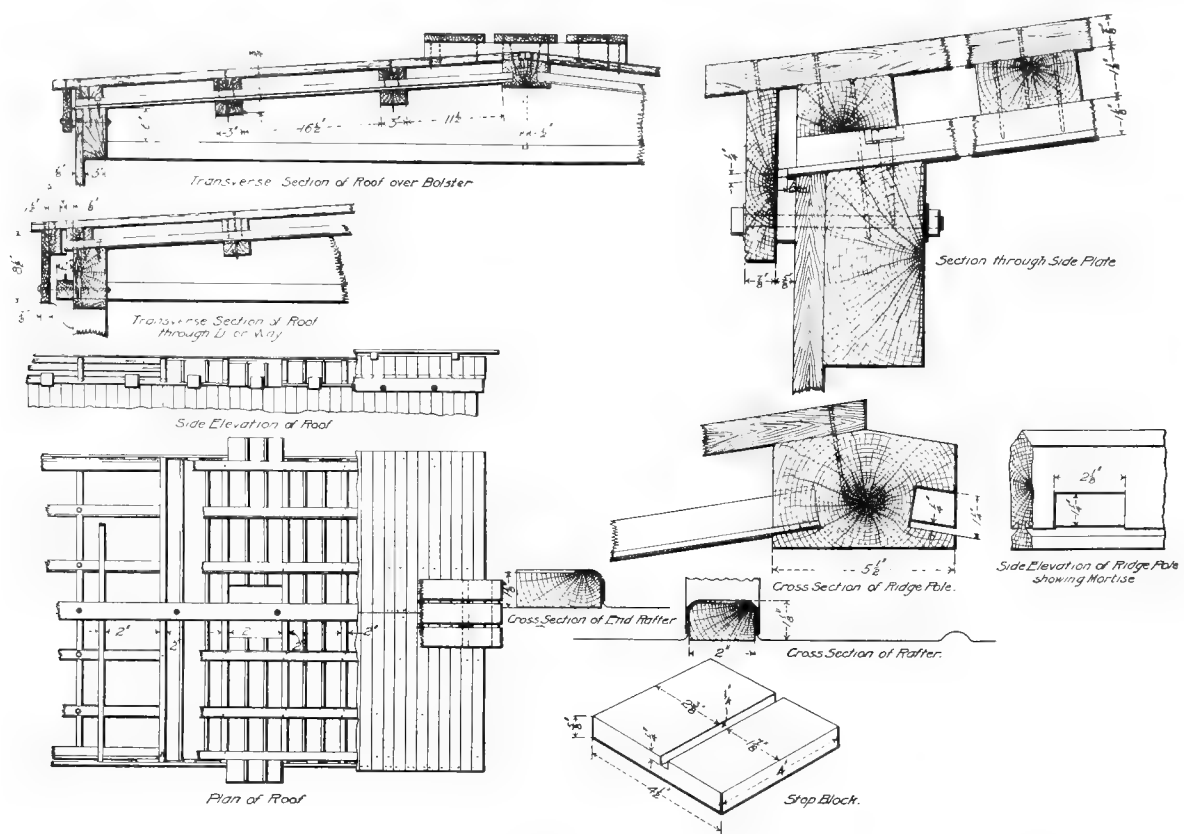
Chicago Improved Winslow Roof. Chicago-Cleveland Car Roofing Company.
